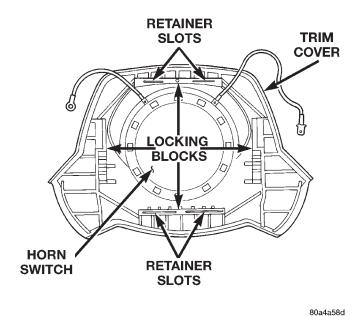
Driver Side Airbag Trim Cover Remove/Install
